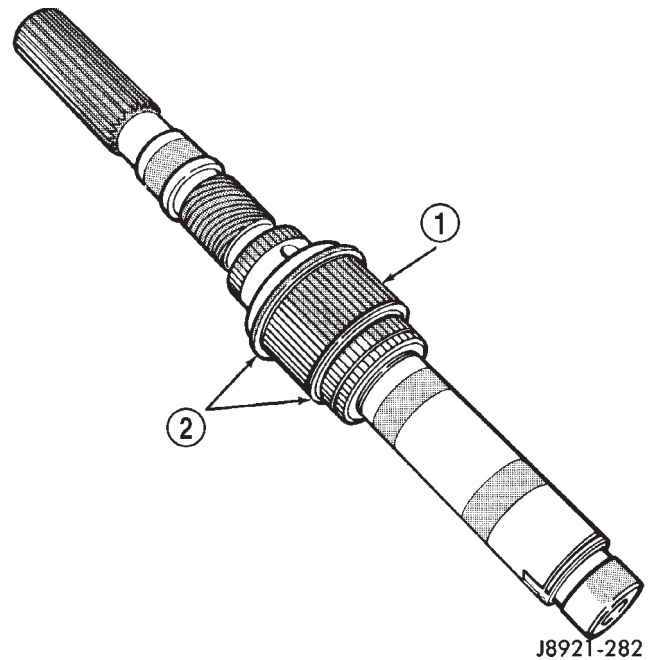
Installing Mainshaft Bearing Rollers and Spacers
